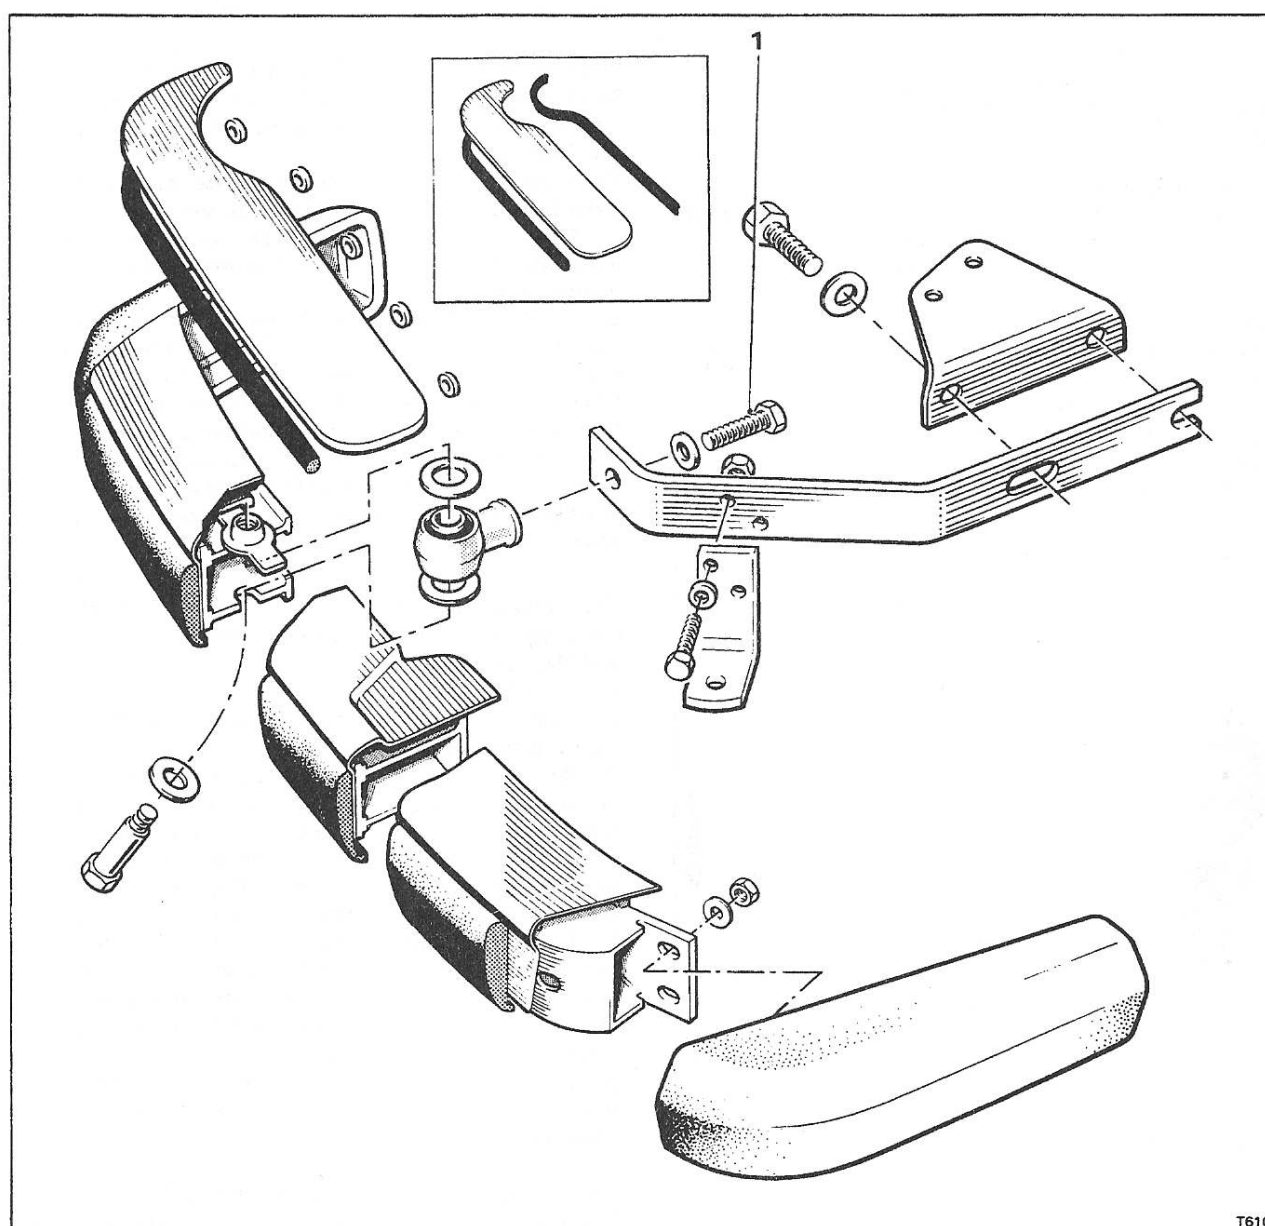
Front bumper assembly (Silver Shadow II, Bentley T2, Silver Wraith II and Corniche)
